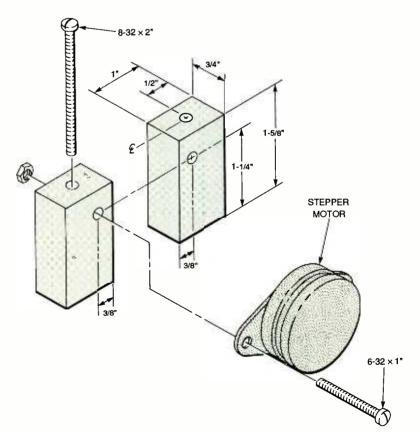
The mounting blocks for the table stepper motor screw directly to the base plate.
